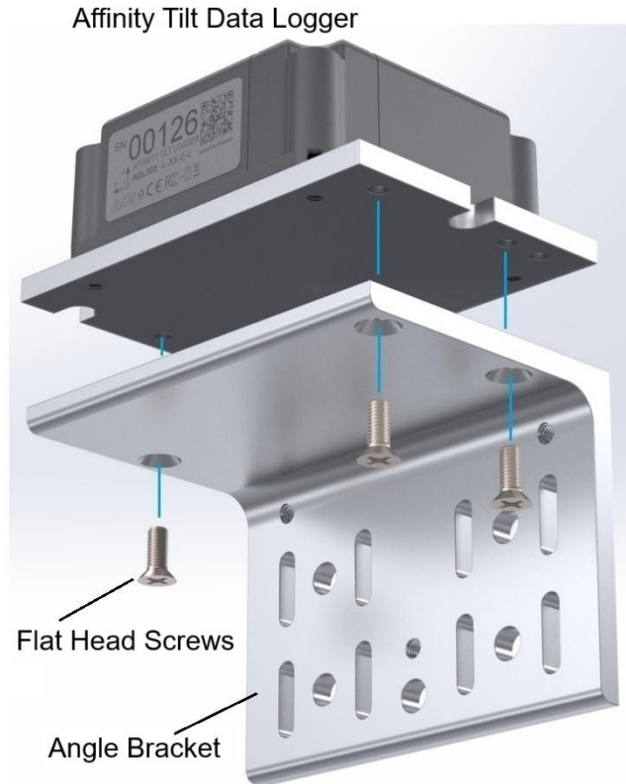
Assembling Angle Bracket onto Affinity Tilt Logger
